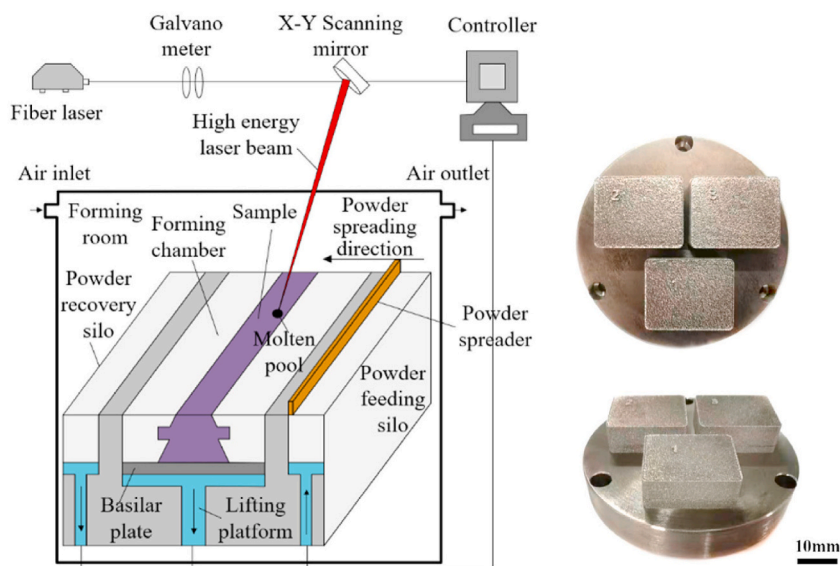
Process schematics for Selective Laser Melting (SLM) [47,48].
